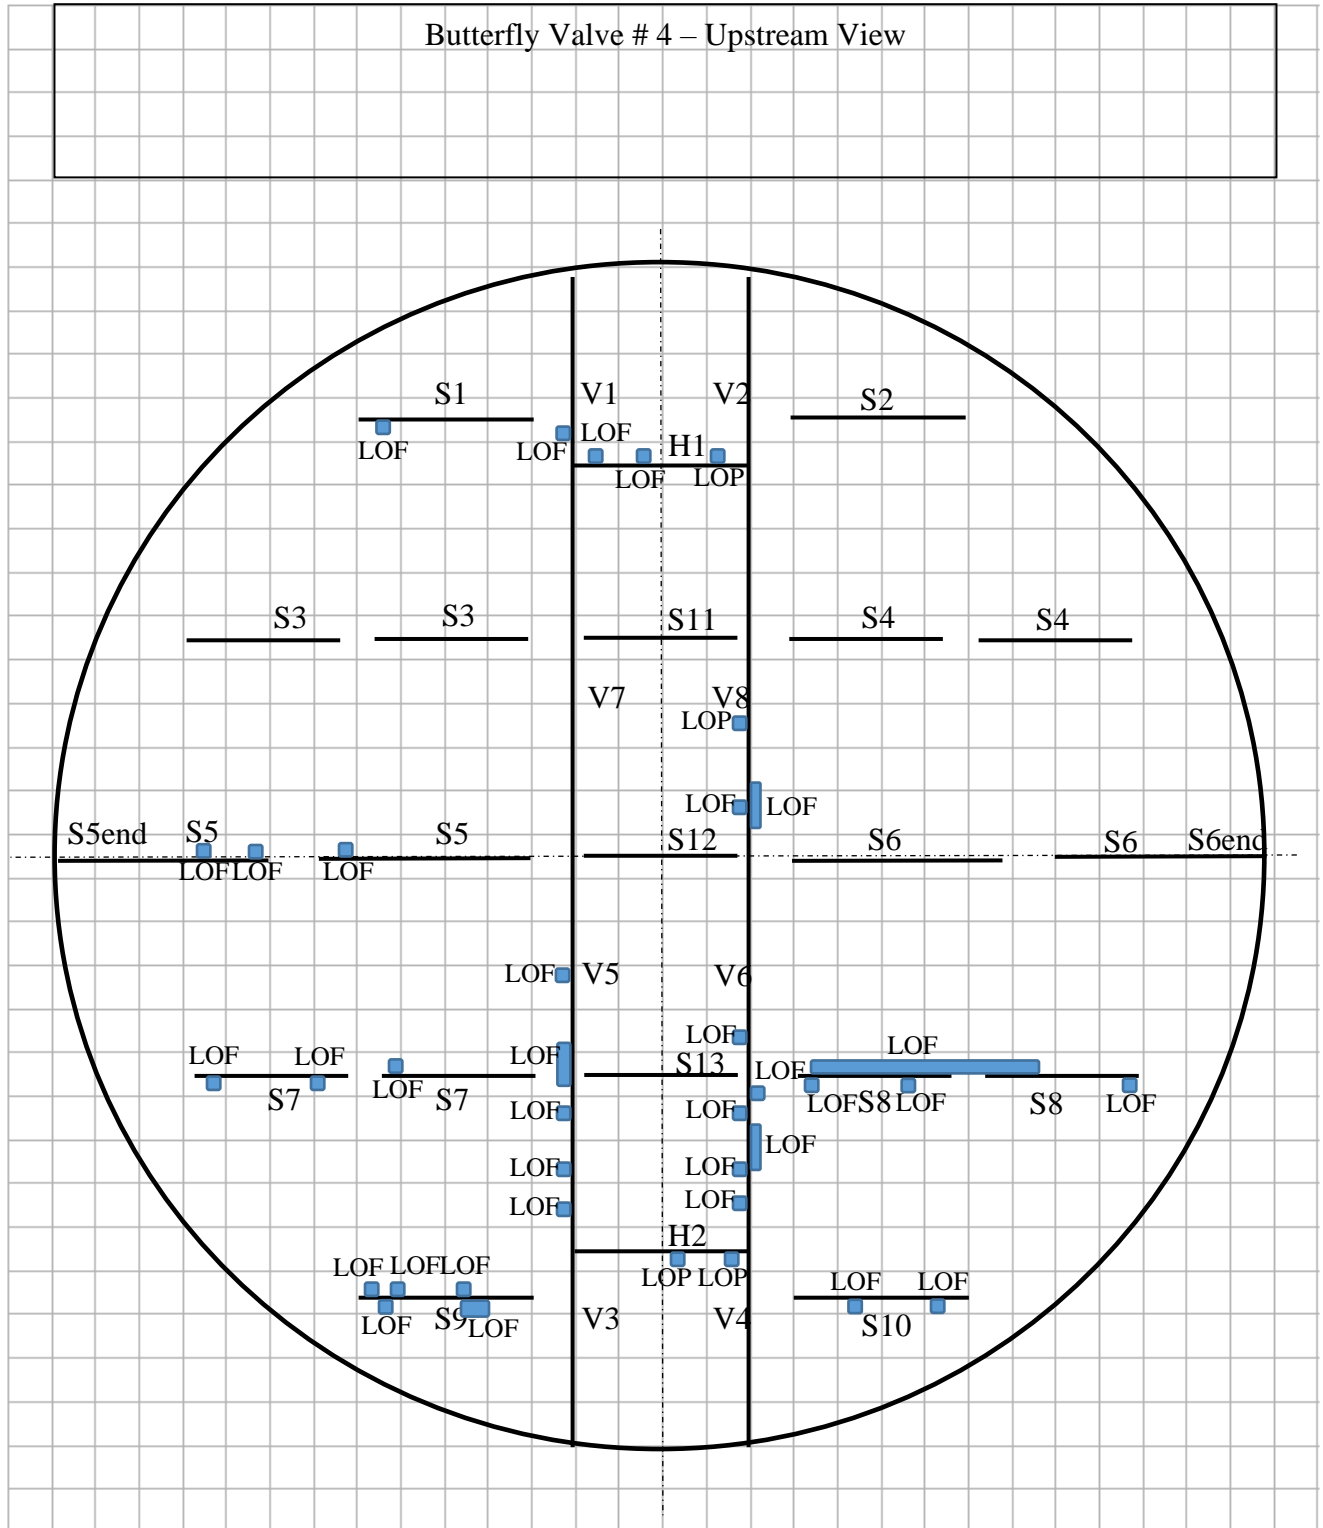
All PAUT weld discontinuities for Valve #4 upstream.
